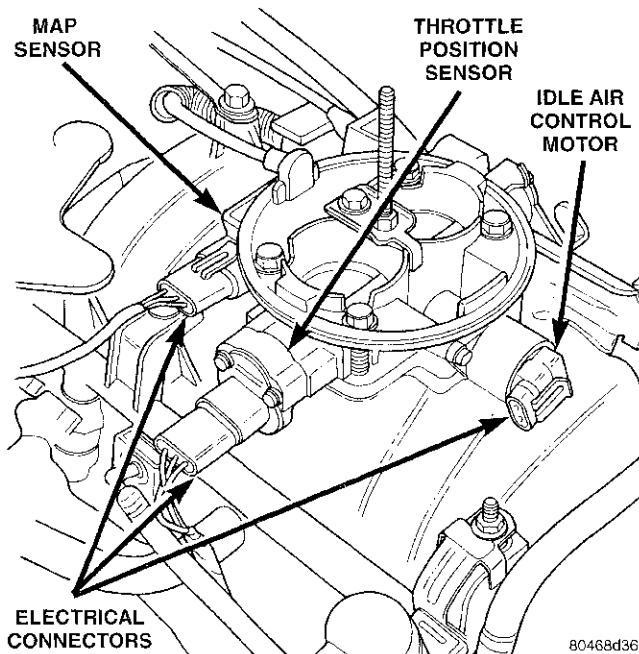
Sensor and IAC Motor Location—Typical (V-8 Shown)
